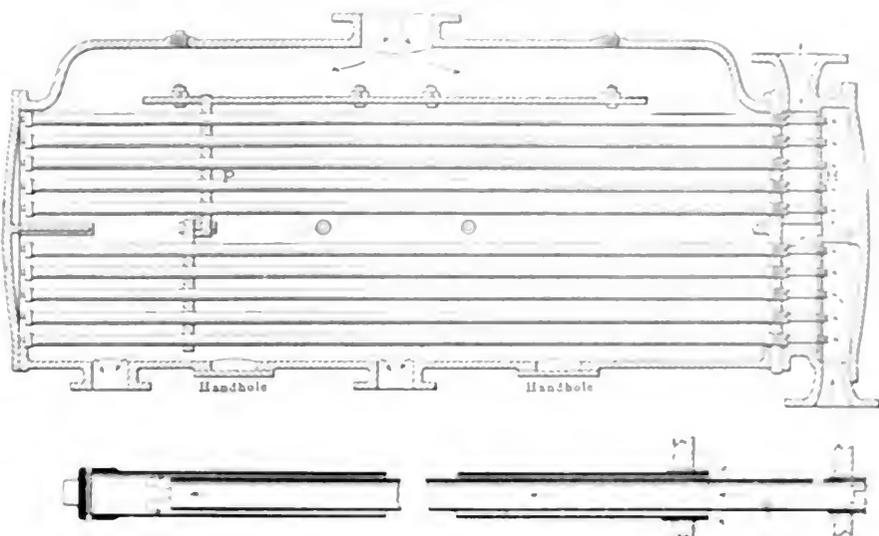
WHEELER EPID-TUBE SURFACE CONDENSER
